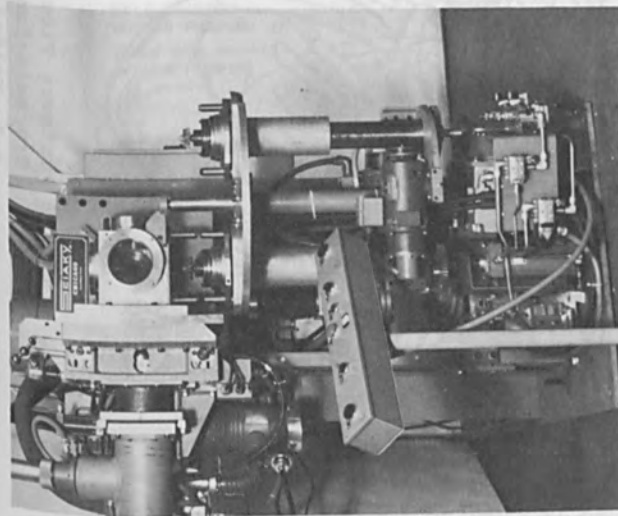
Small Chamber, Bottom Delivery, Dial Feed, EBW, Welding in HORIZONTAL Position.
